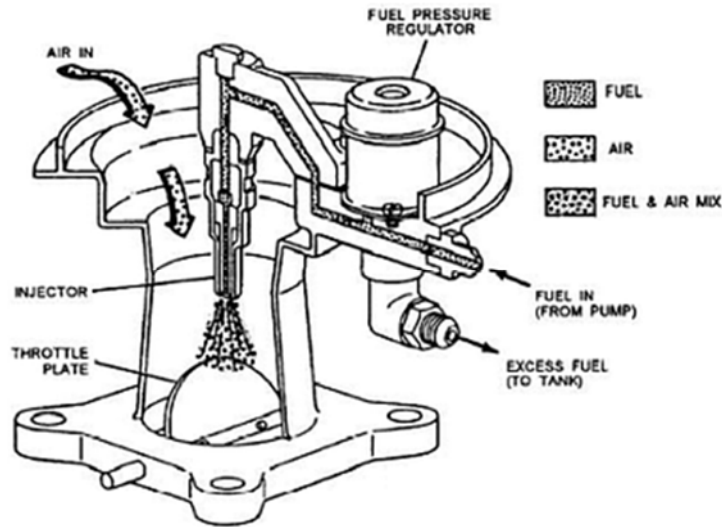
Cutaway drawing of one injector throttle body fuel injection system [14].
